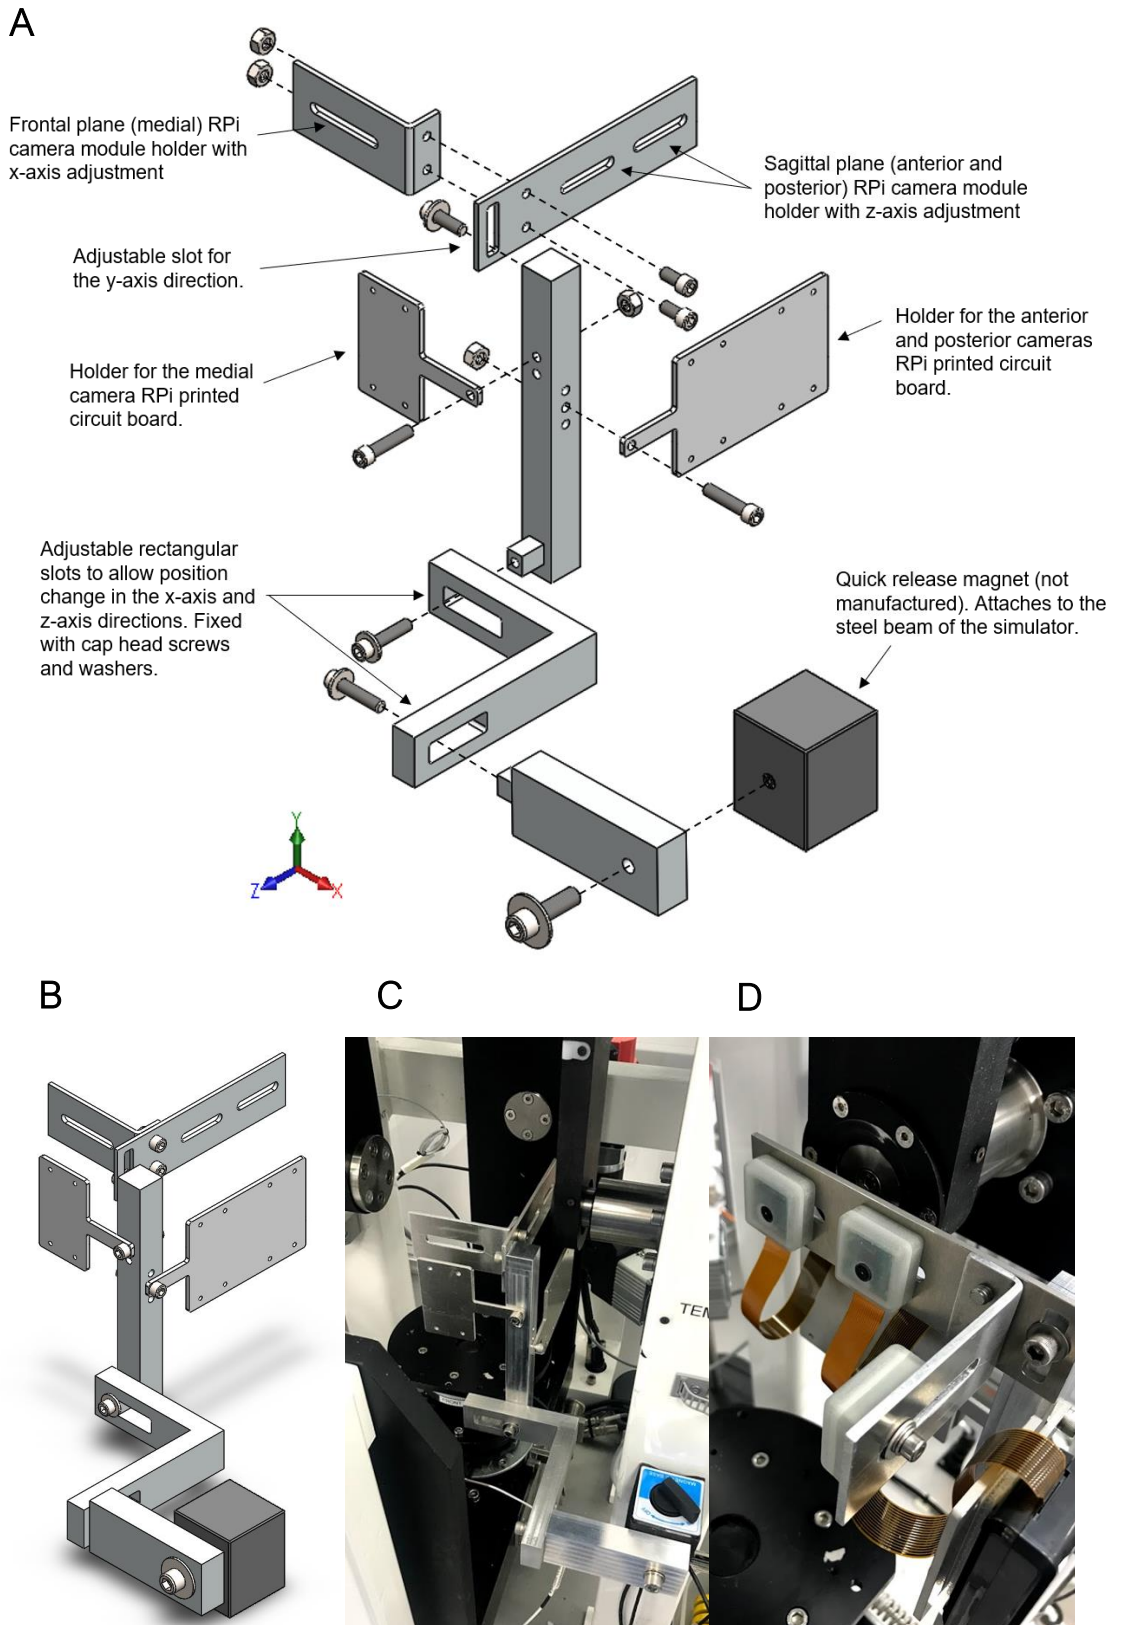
(A) Annotated exploded SolidWorks assembly and (B) complete SolidWorks assembly of the camera holder design. (C) Manufactured camera holder adhered to the simulator and (D) with the Raspberry Pi cameras mounted.
